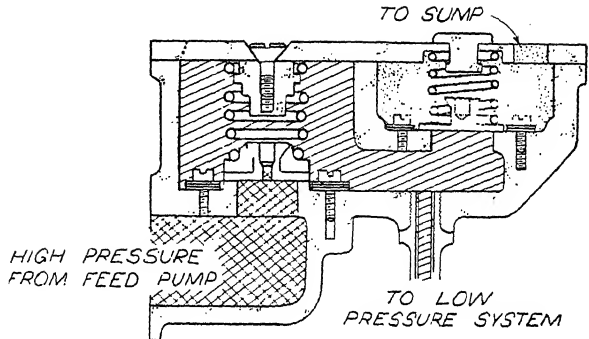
TYPICAL RELIEF VALVE ARRANGEMENT.
